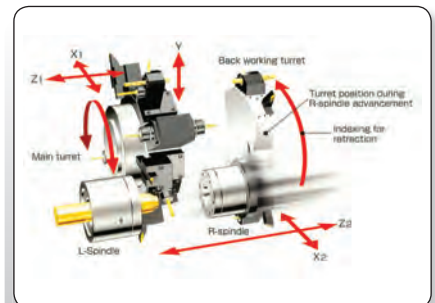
Automatic tool exchange at the CNC lathe-type machining centre [Miyano]
